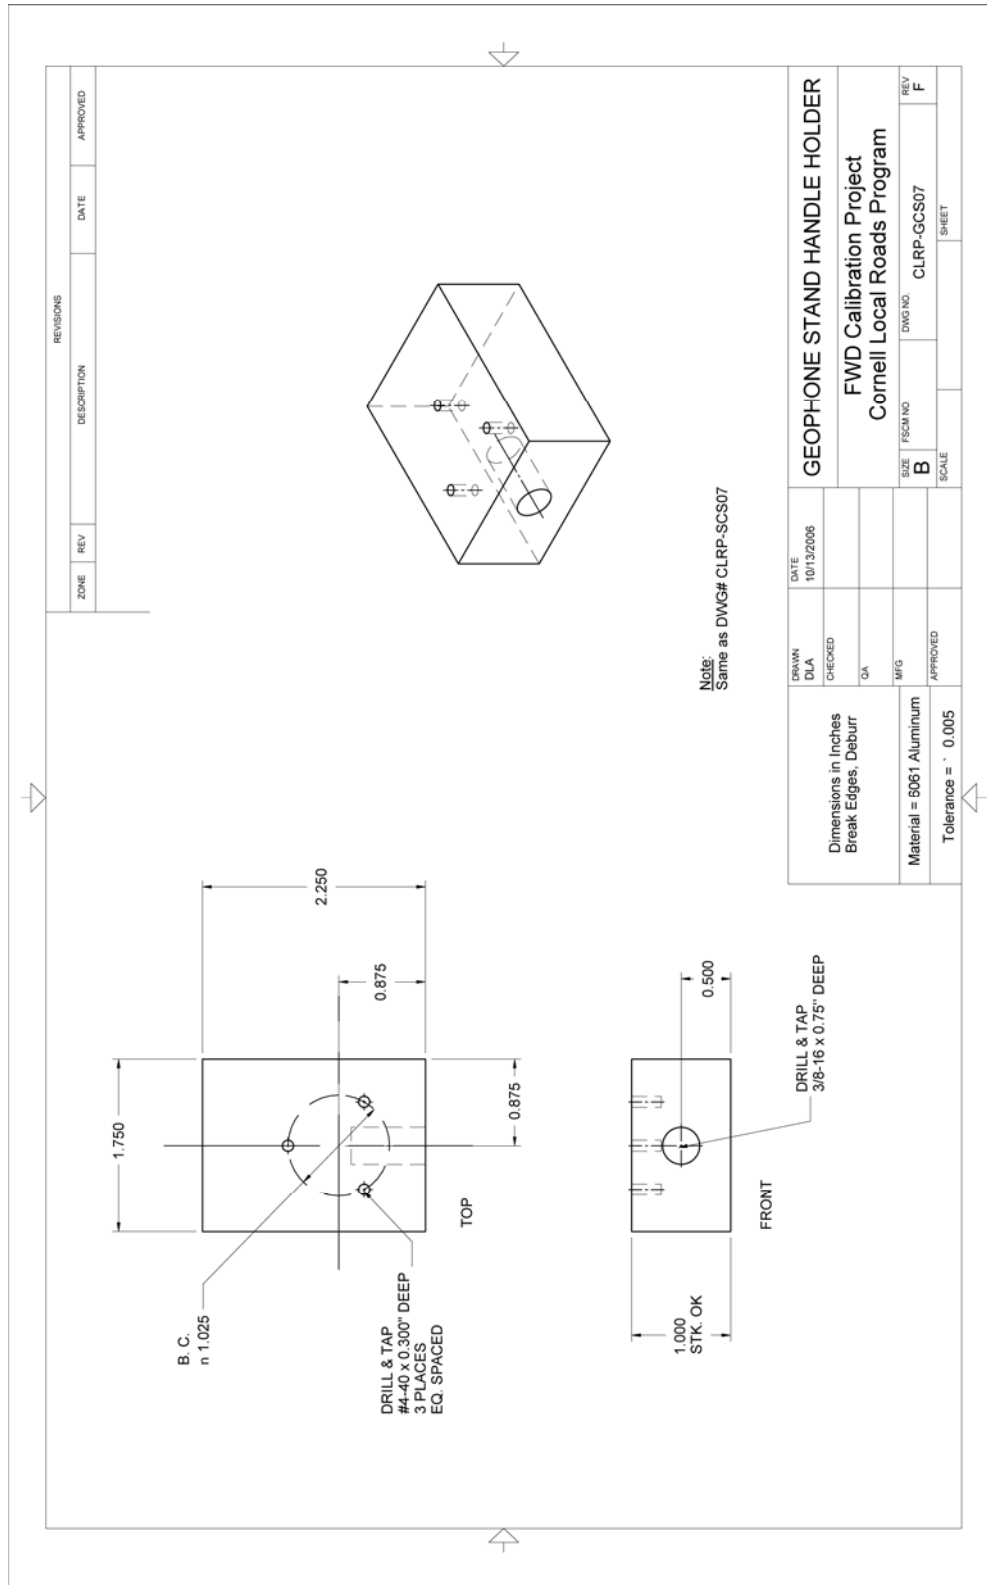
Drawing. CLRP-GCS07 Geophone Stand Handle Holder.
